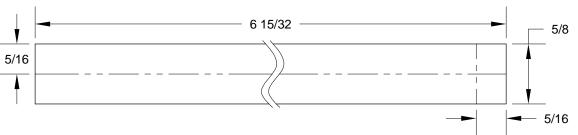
CUTTING AND MARKING THE W-1029D SPACER
